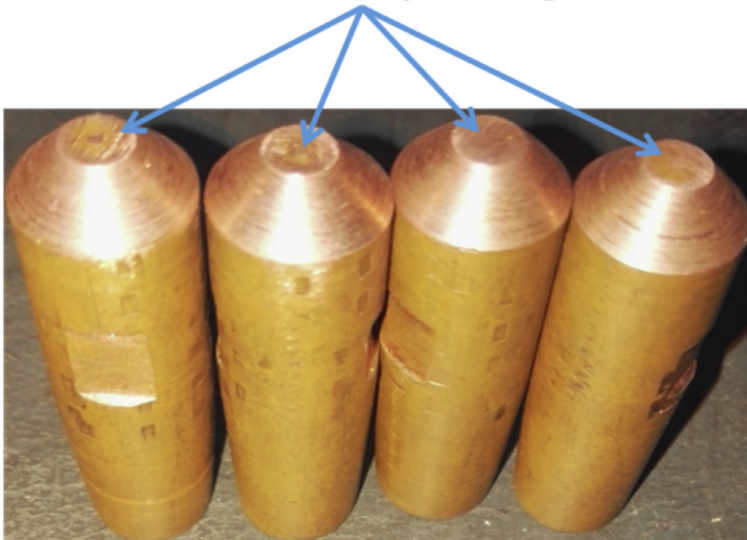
Conventional solid spot welding electrodes used in the study.
